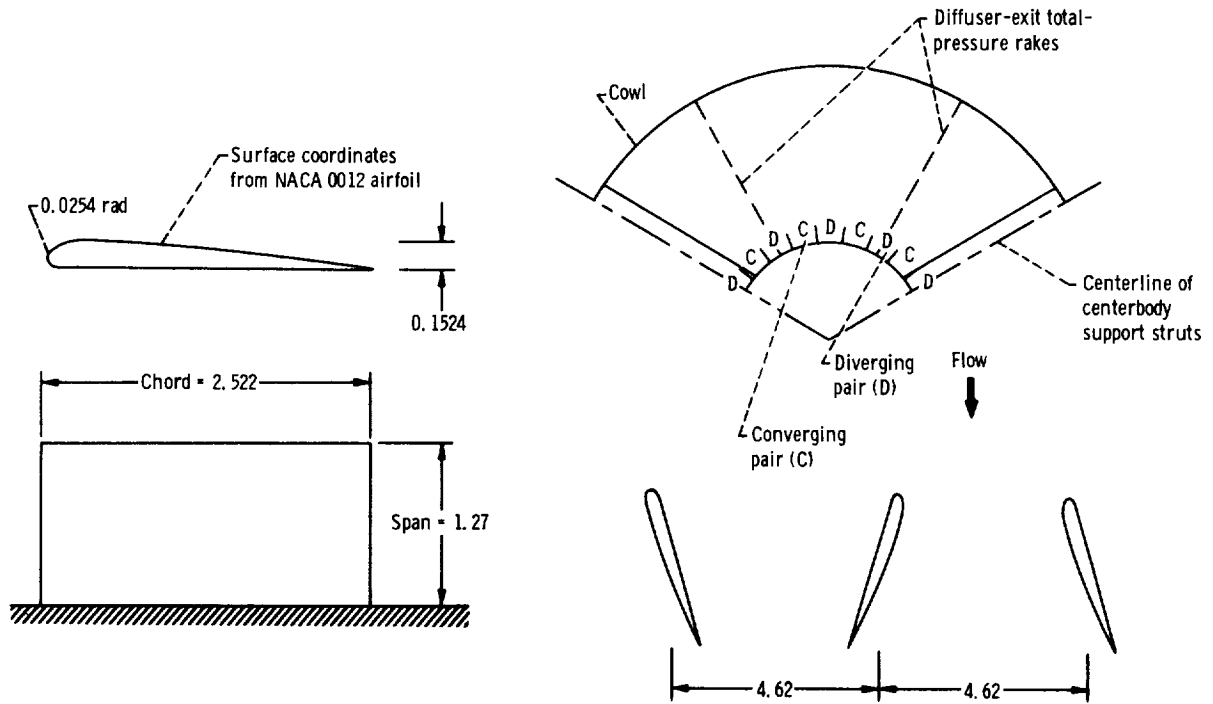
Vortex generator design. Dimensions are in centimeters.
